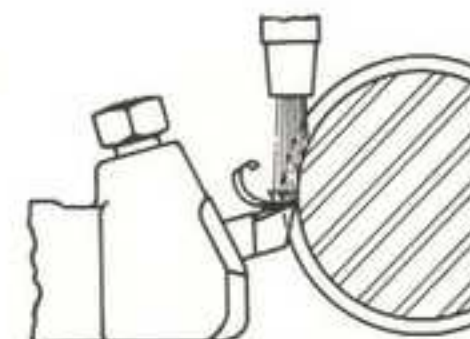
Coolant Should Make Contact with Work Where Cutting Action Takes Place
